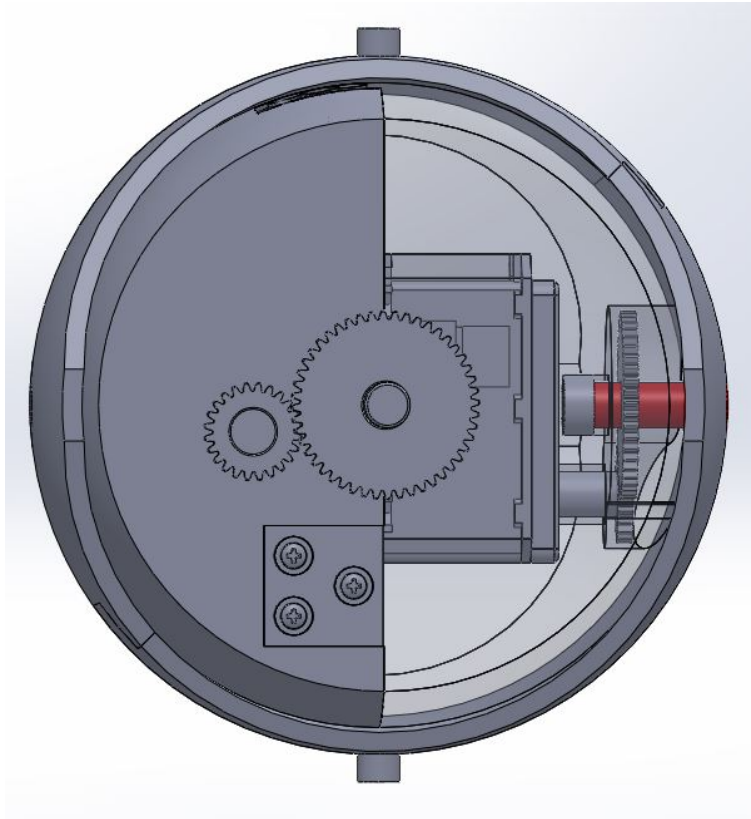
Red shaft enables Jimmy to swing his leg sideways.
